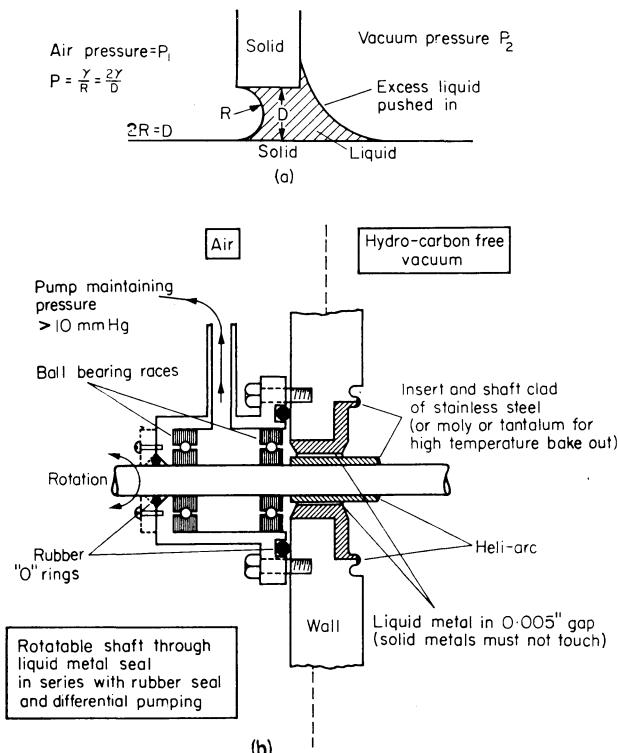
Surface tension seal: (a) principle; (b) construction. Reproduced from Milleron⁸⁶⁵ (*Courtesy of Pergamon Press*)
